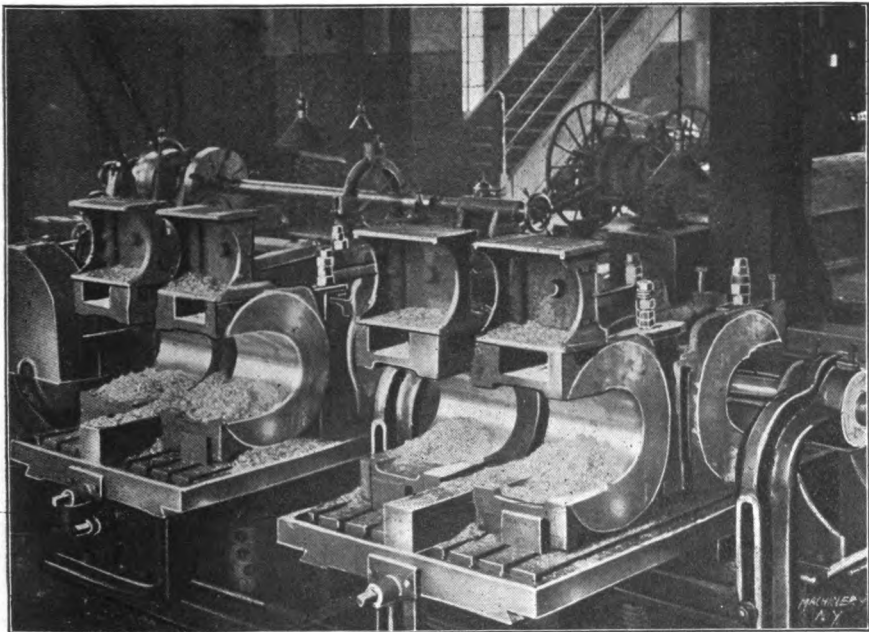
The Work Completed. Finished Bearings ready for Removal from Boring Machine
